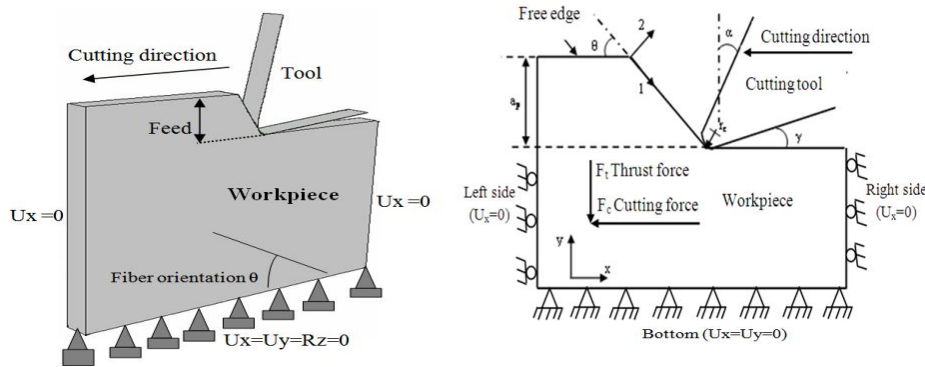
Schematic view of the 3D orthogonal cutting model showing the tool geometry and composite workpiece. θ is the fibre orientation, α the tool rake angle, γ the flank angle and r_e the tool nose radius. (123) is the principal material system, a_p being the depth of the cut
